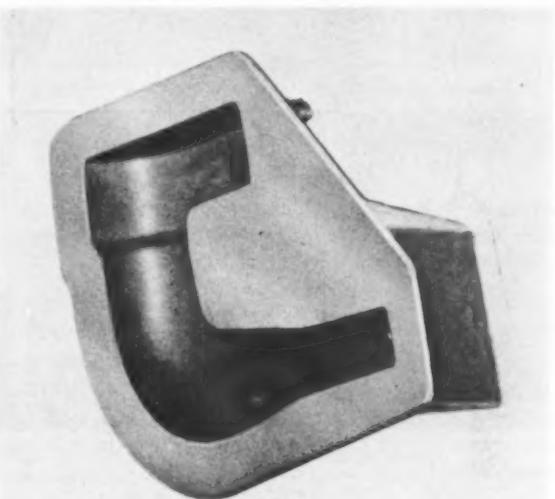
Sprayed shell pattern accurately reproduces contour, dimensions and finish of plug.
